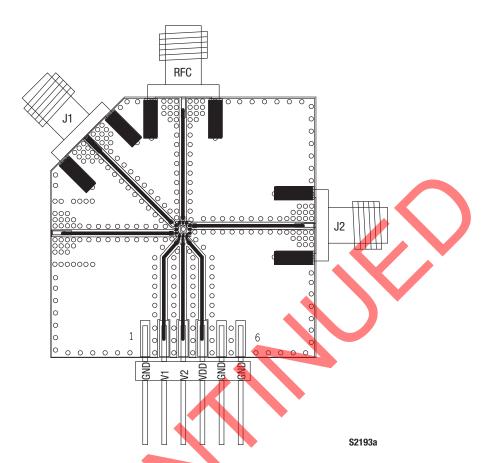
SKY13472-460LF Evaluation Board Assembly Diagram
